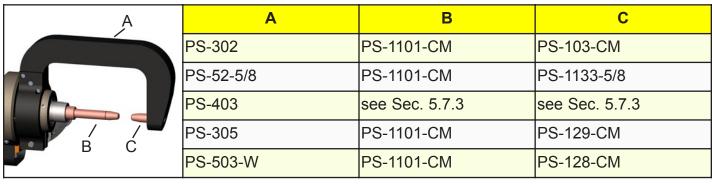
Extension arm - Welding electrode configuration chart
